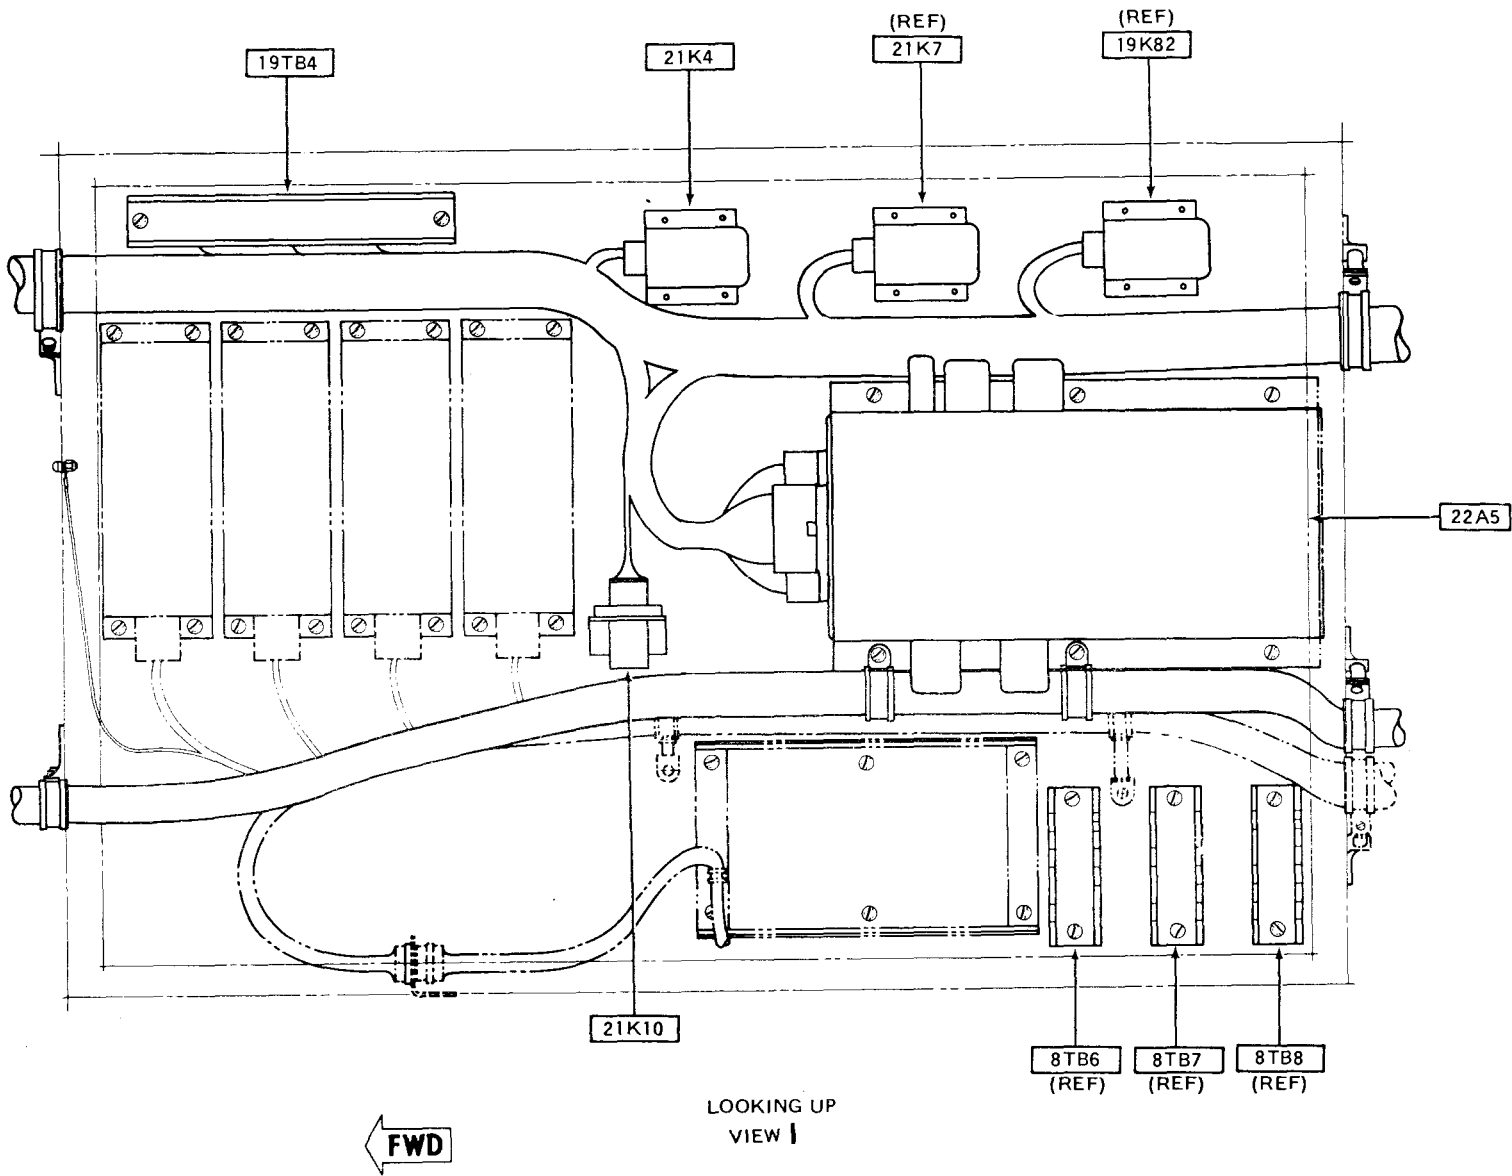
M Wing Stores Armament Subsystem (Equipment Location) (Sheet 10 of 12)
